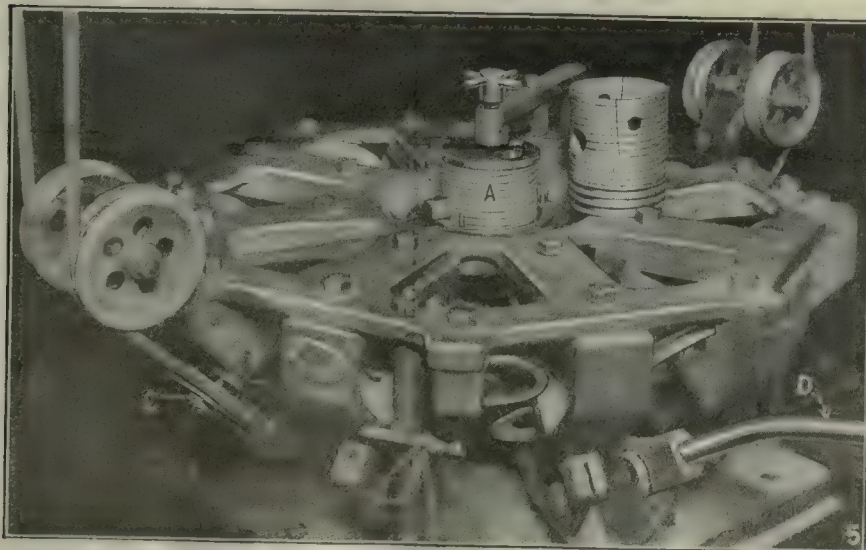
DRILLING OIL HOLES AROUND PISTON
